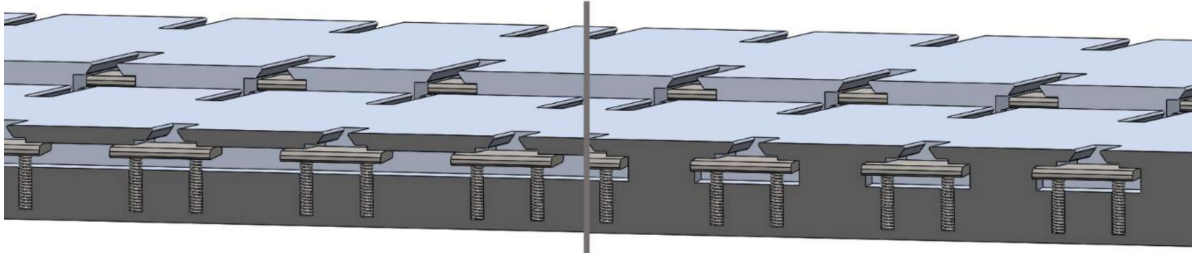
Tool Design Adjustment for Bar Movement Constriction
